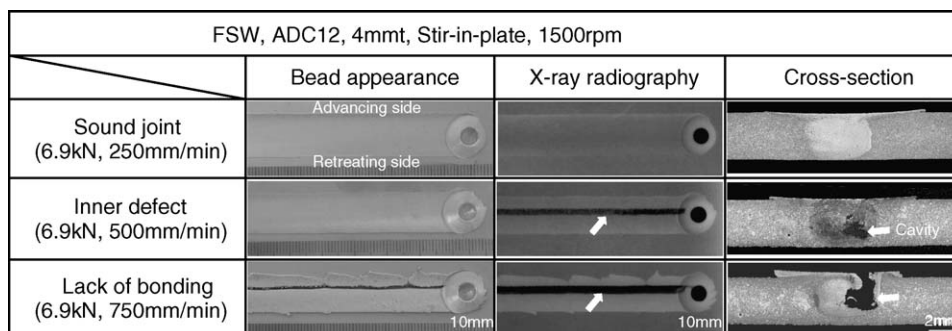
Inspection of FSW joints by visual, X-ray radiography and cross-section.
